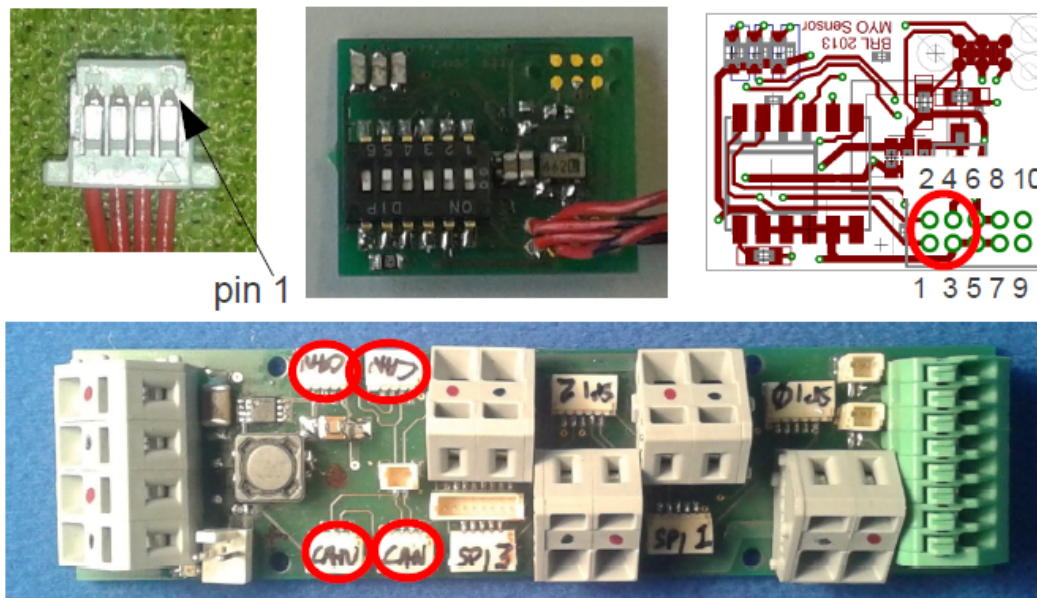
Cables and connectors to connect the joint angle sensor board to the e distribution board; red circles mark the applicable connectors on the printed circuit boards.
